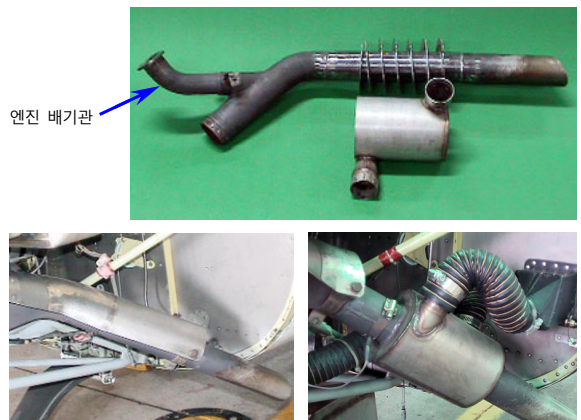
Heating system installed in the exhaust system (top : before, bottom : after)
